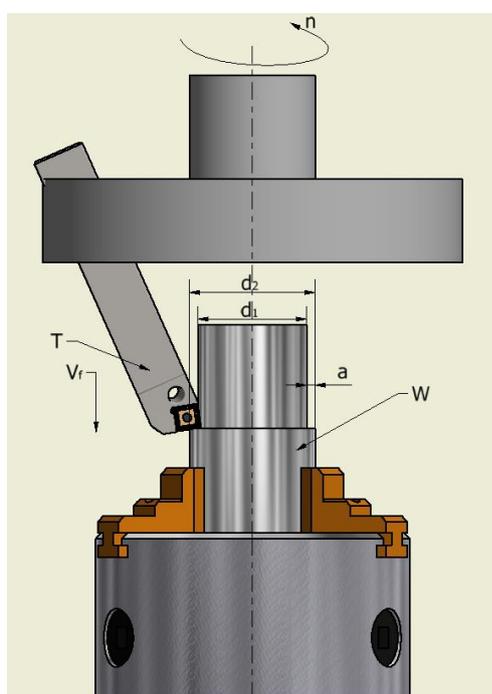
Outer boring with single point cutting tool having defined edge geometry
